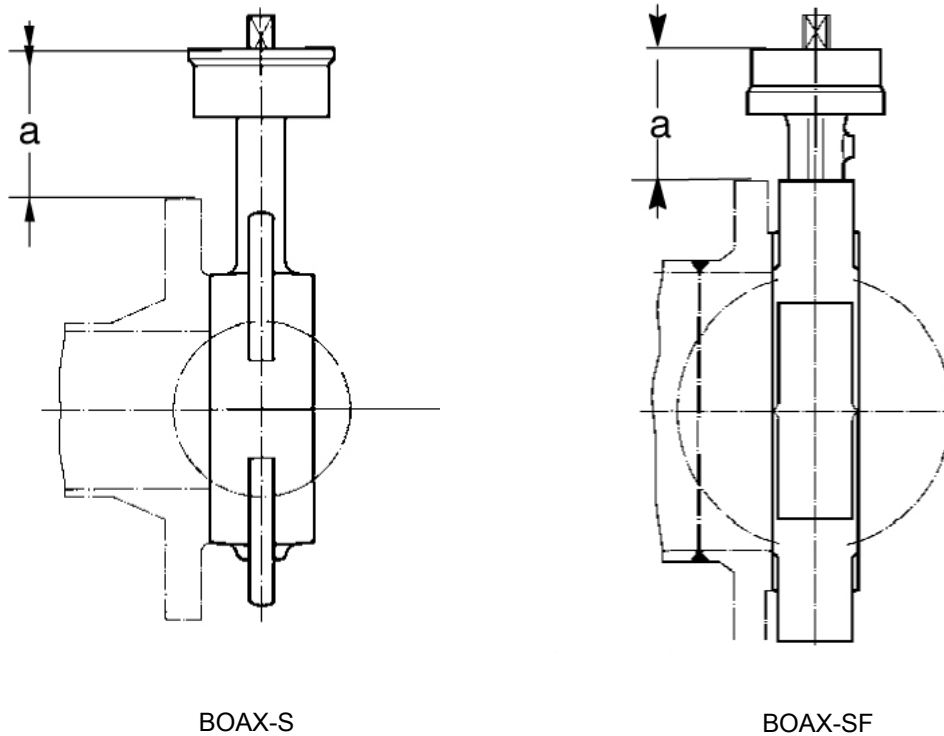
Flange connection for BOAX-S and BOAX-SF
